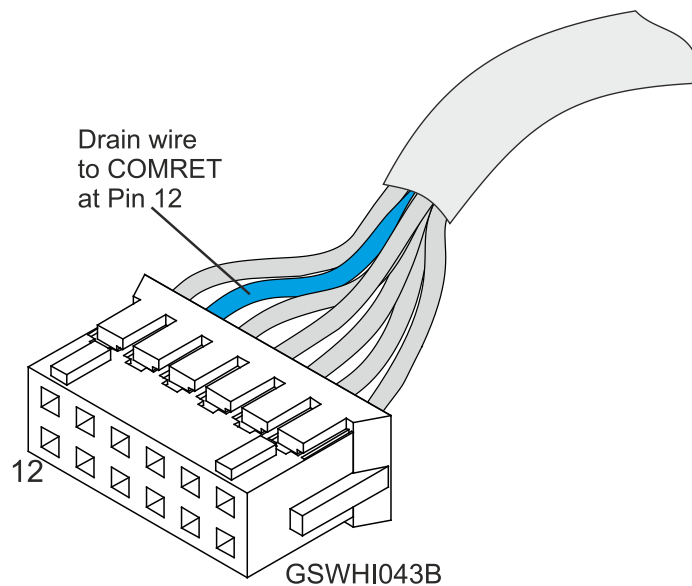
Feedback and Shrouded Control Cable Assemblies – Example
